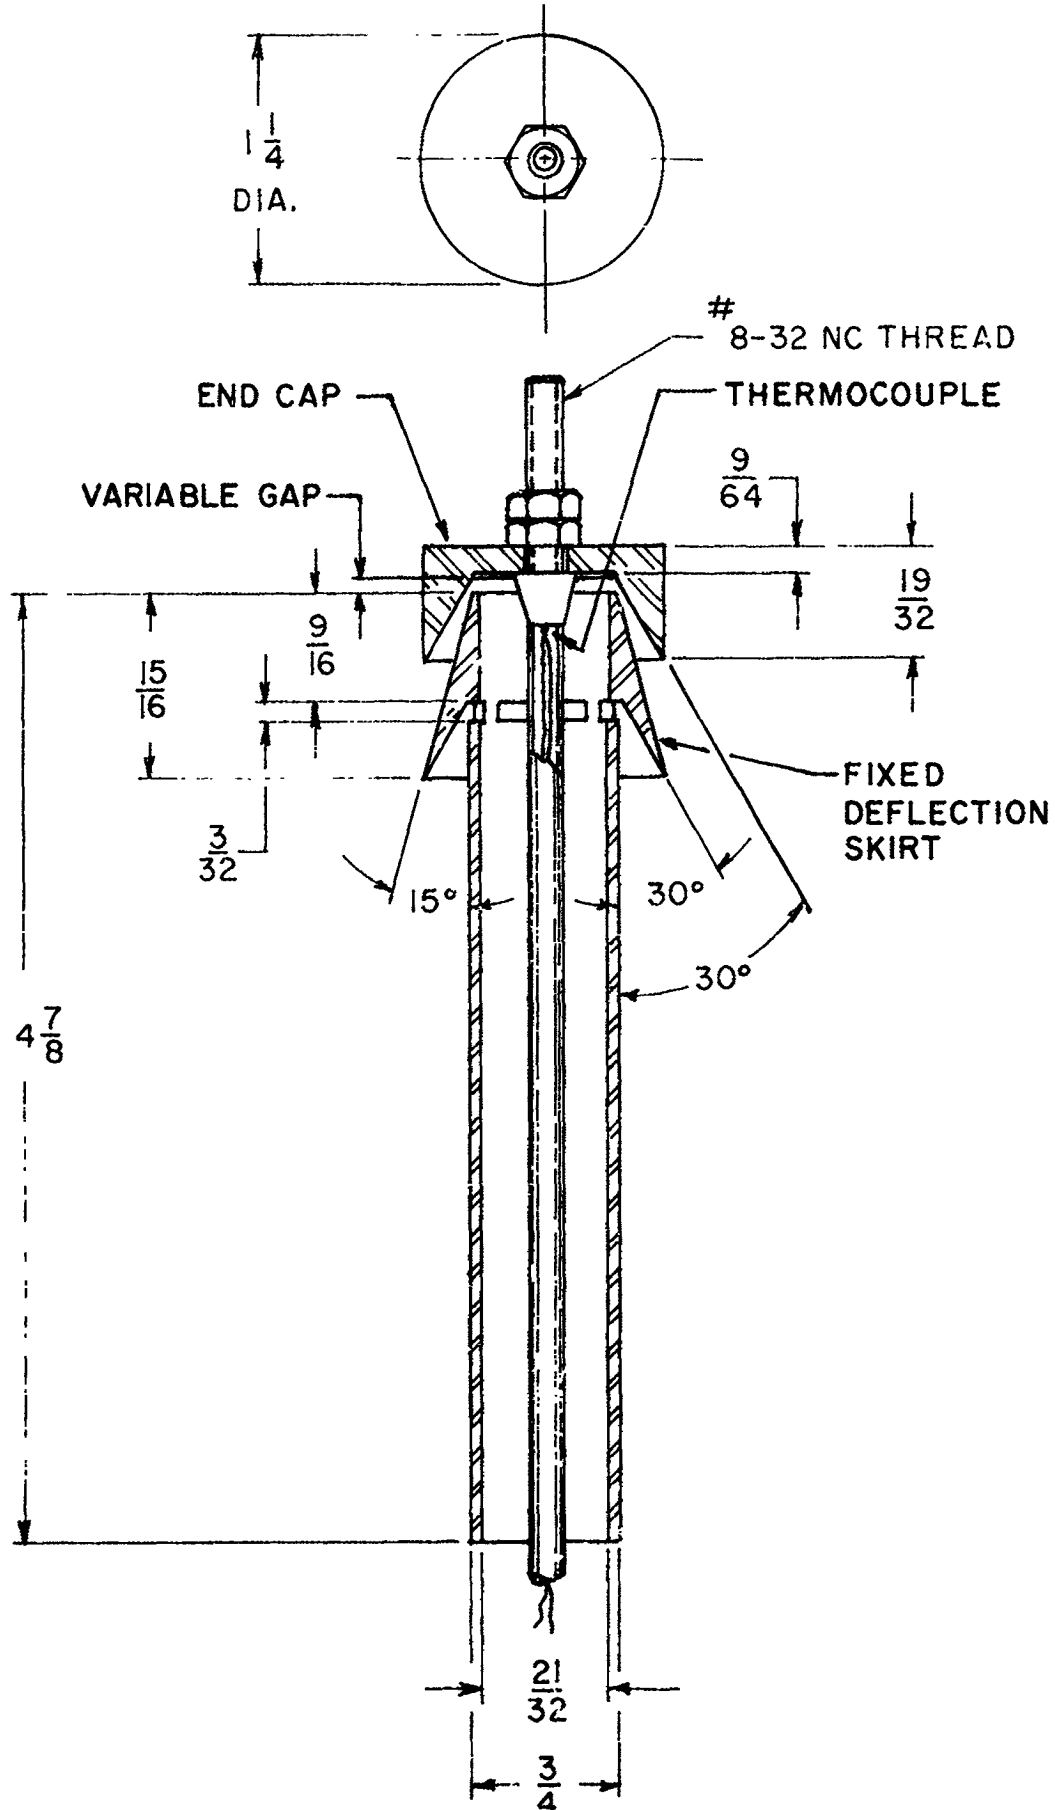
Schematic Diagram of a Dual Expansion Nozzle Assembly. An umbrella jet can be formed or eliminated by opening or closing the gap between the main assembly and the adjustable end cap.
